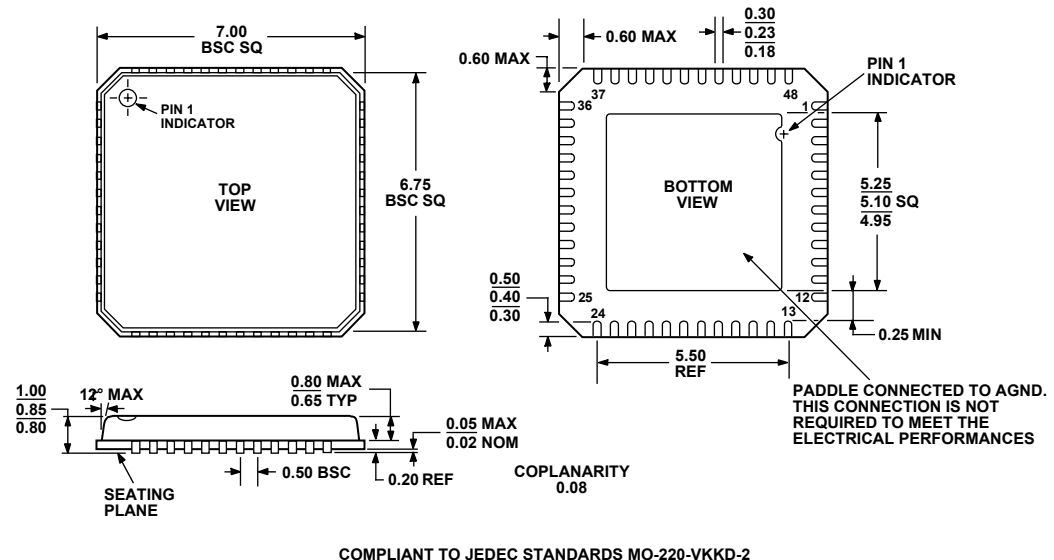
48-Lead Frame Chip Scale Package (LFCS) [CP-48]
